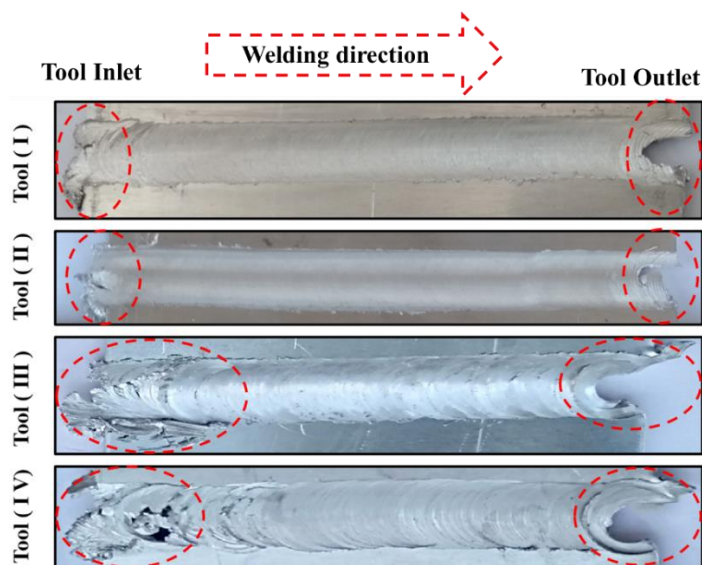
Top view of the weld appearance with different tool ratios
